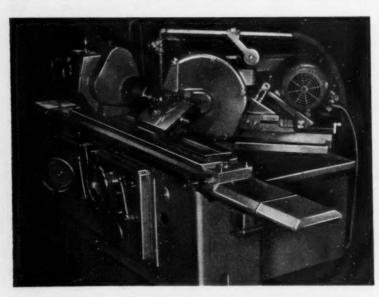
Type KFG Heavy-duty Angle Head Grinder Introduced by Keighley Grinders (Machine Tools), Ltd.
